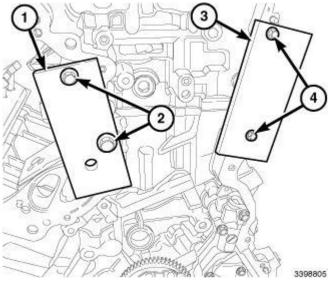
Cylinder Head Alignment Tools & Bolts Courtesy of CHRYSLER GROUP, LLC
